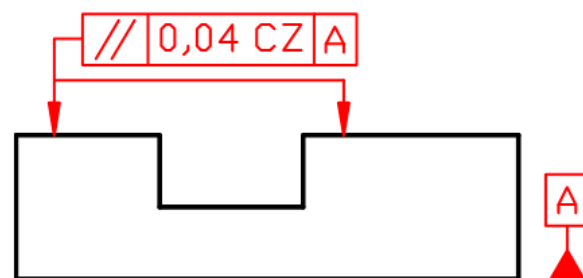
The parallelism tolerance with the CZ modifier: two tolerated surfaces shall be considered together—widely used but not fully defining specification.
